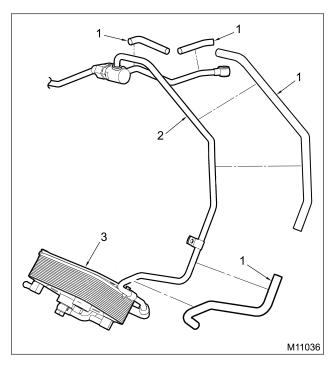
Fuel line sleeve — High-pressure pump to cooler tube assembly
